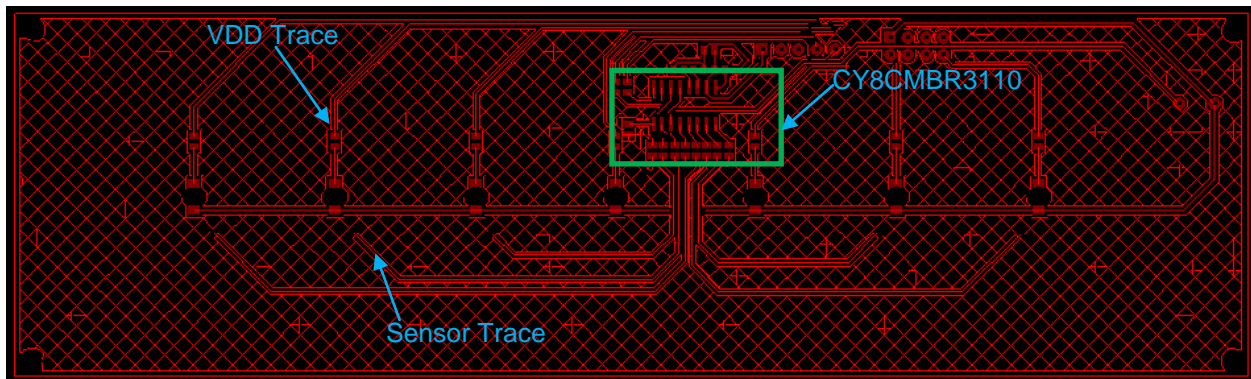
Water-Tolerant Touch Buttons on FR4 PCB – Bottom Layer
